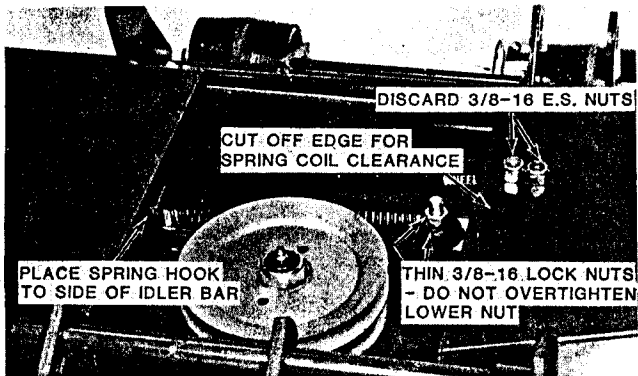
Lower Idler Spring (48 in./122 cm Mower)
